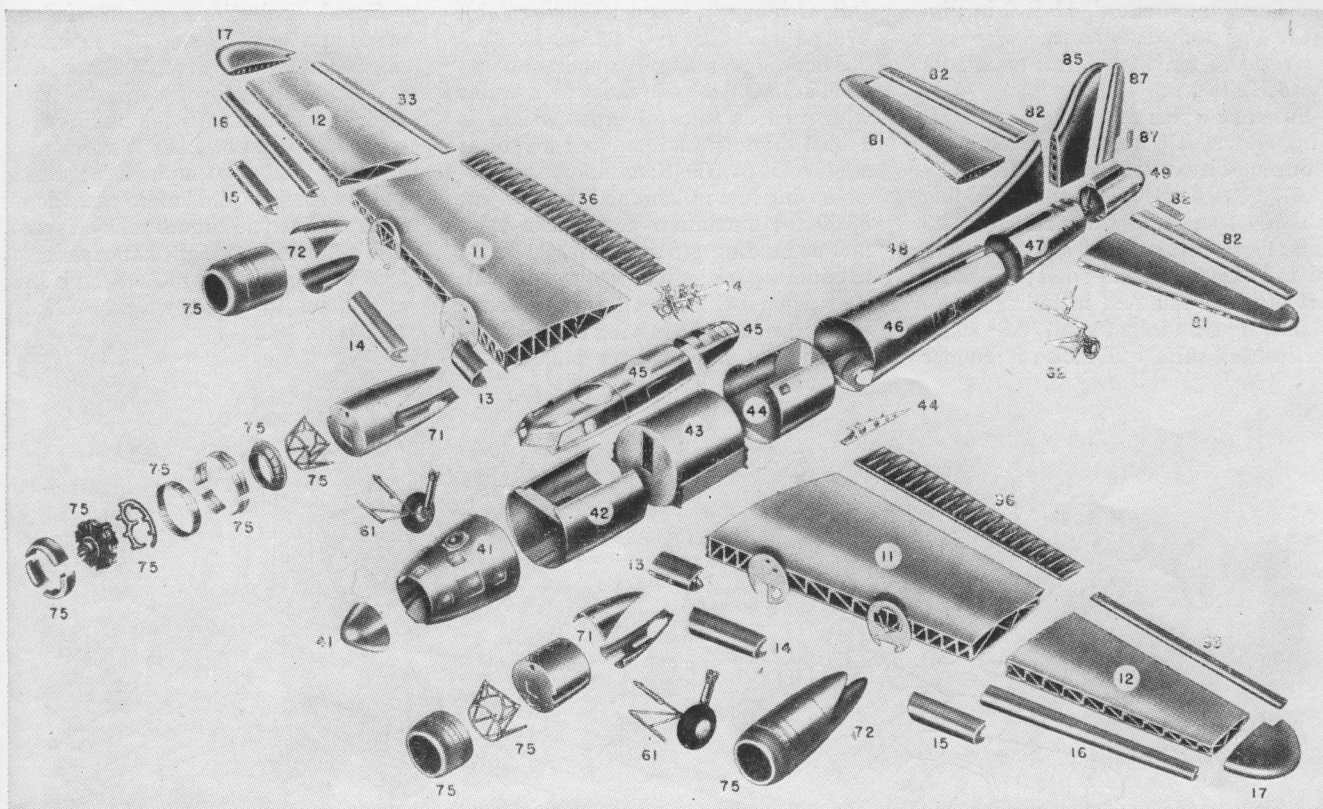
Exploded view of Boeing B-17 Flying Fortress showing subassembly breakdown.
